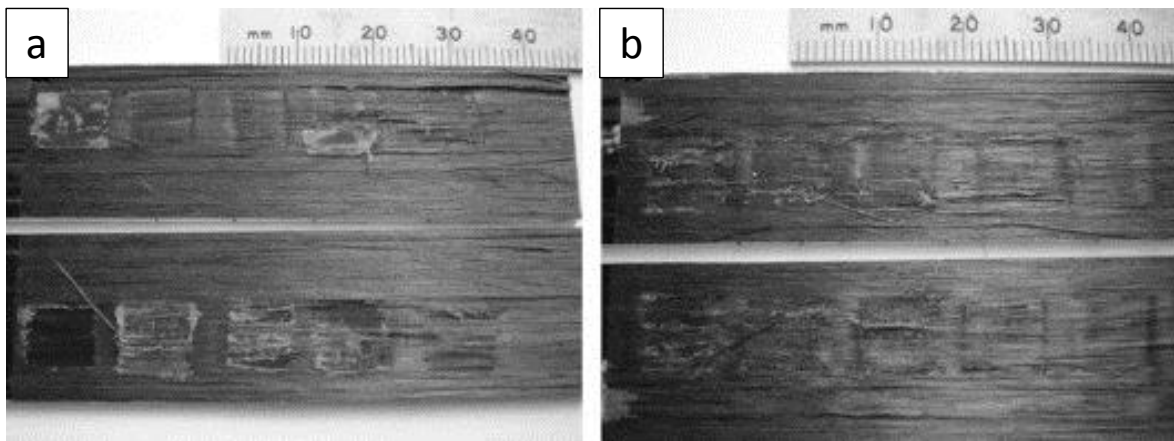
DCB tested fracture surfaces of samples with inserted films [11].
